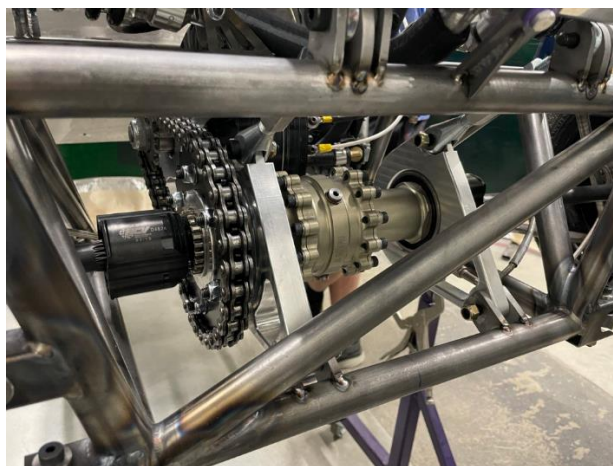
Differential Assembly Mounted on Frame Missing Gussets
